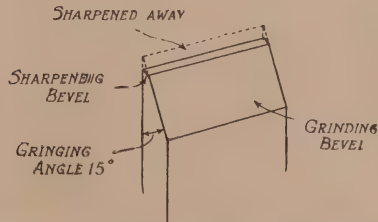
Chisel Blade, showing Grinding and Sharpening Angles
